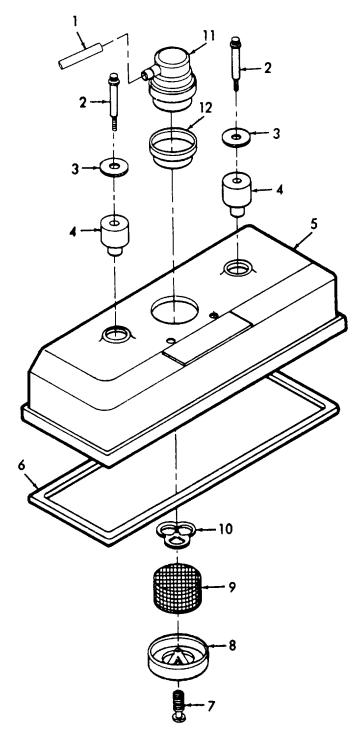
Rocker Arm Cover, Removal/Installation.
